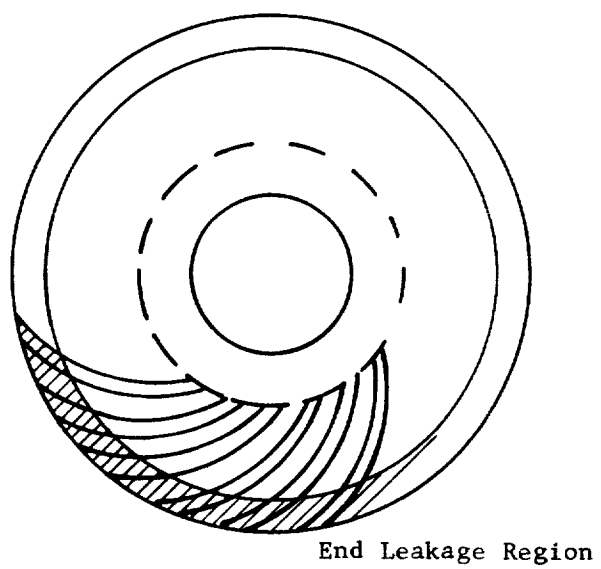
End Leakage in Spiral-Grooved Bearings
